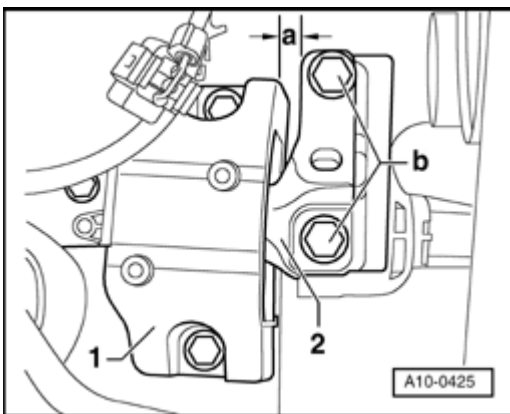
Identifying Engine Supports Bolts & Distance Between Engine Console & Support Arm
